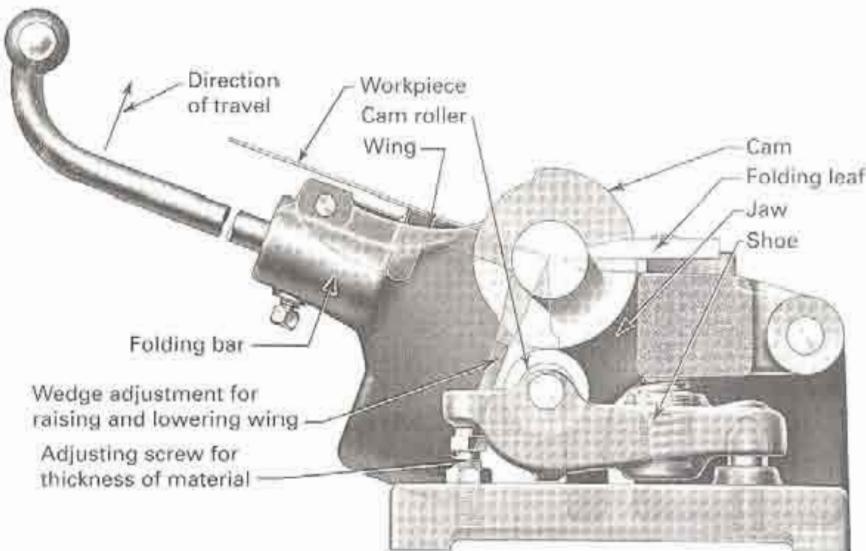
Phantom section of a bar folder, showing position and operation of internal components. (Courtesy of Niagara Machine and Tool Works, Buffalo, NY)
